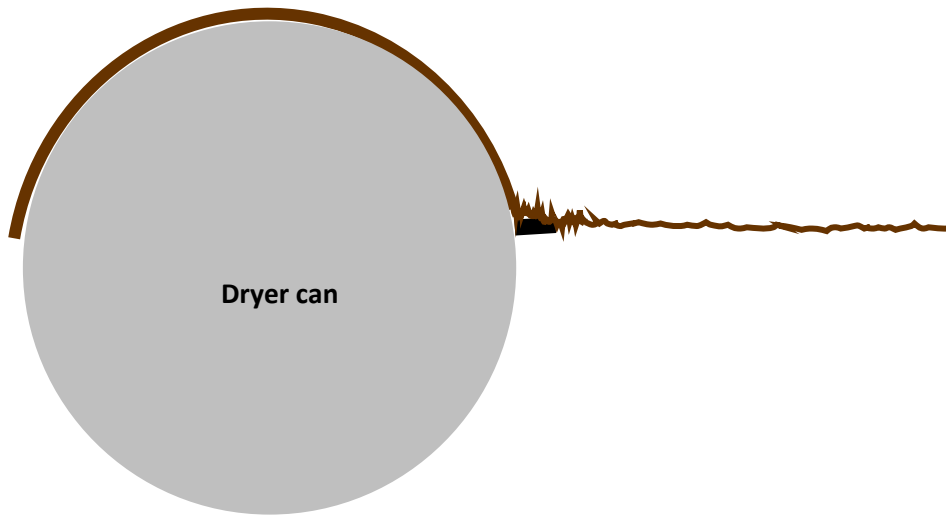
Sheet of paper, dryer can, and creping blade (machine direction is moving to the right).
